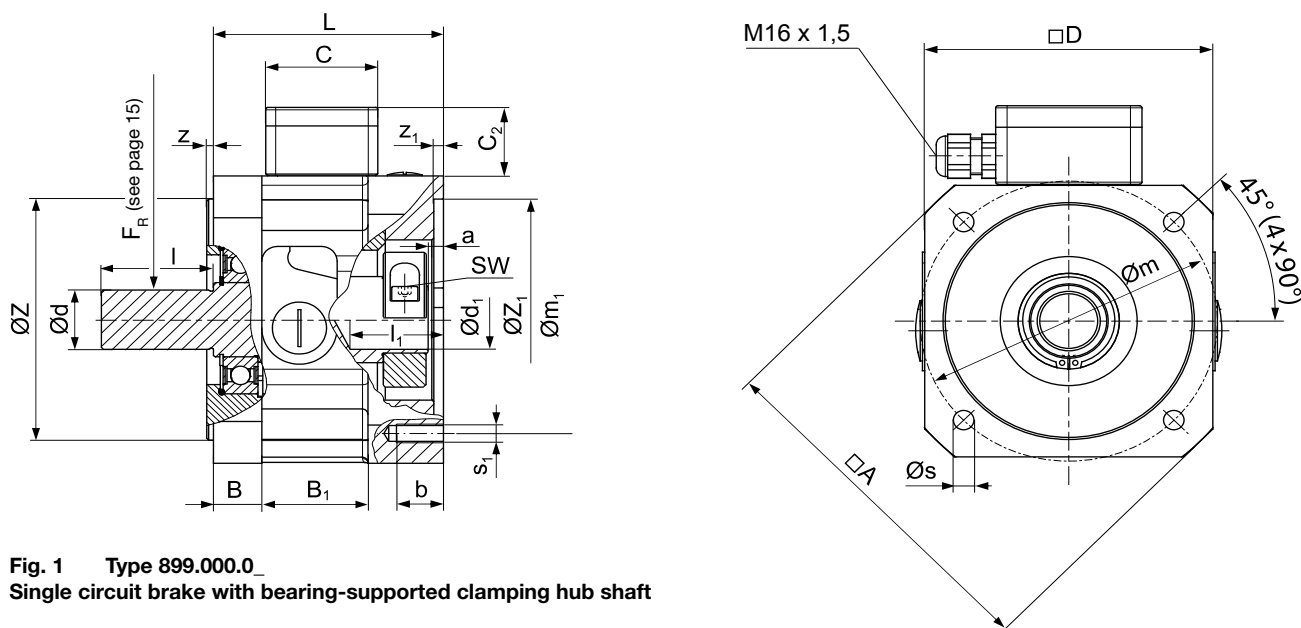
Type 899.000.0_ Single circuit brake with bearing-supported clamping hub shaft
